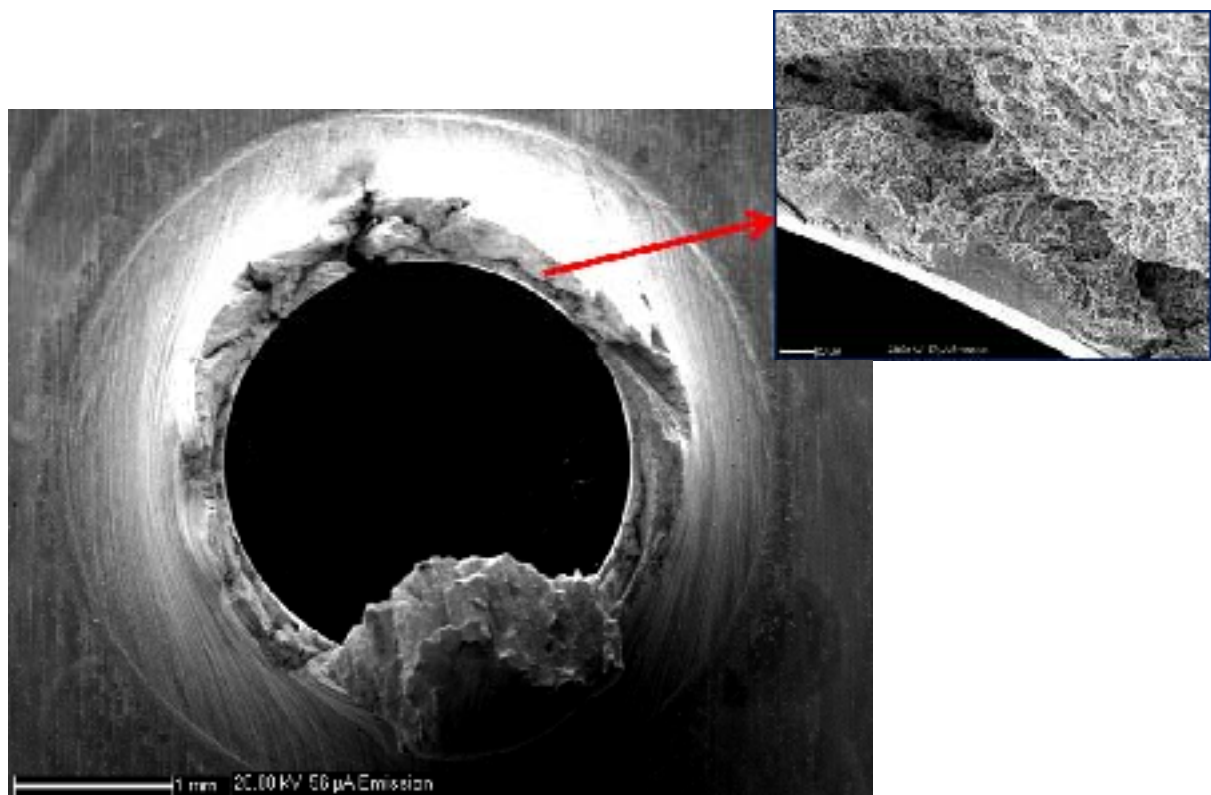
SEM fractograph of weld metal specimen tested at 923 K.
